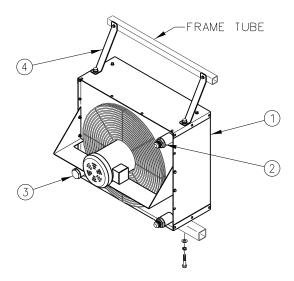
Heat Exchanger Assembly PARTS LIST
